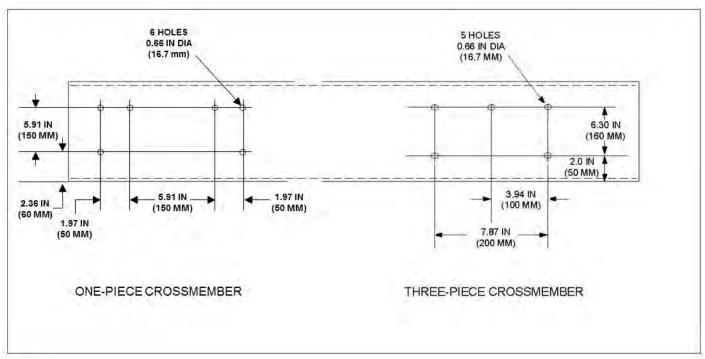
Crossmember Gusset Hole Patterns (Additional Holes Available in 50 mm Horizontal Increments)
